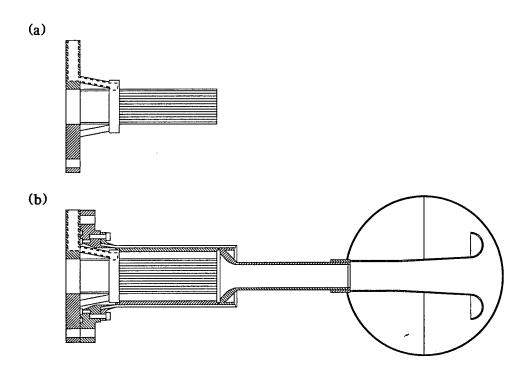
Space Thermo-Acoustic Refrigerator (STAR) and adapter for testing the anisotropic stack/heat-exchanger unit. a) Adapter. b) Adapter fitted into the existing STAR.
